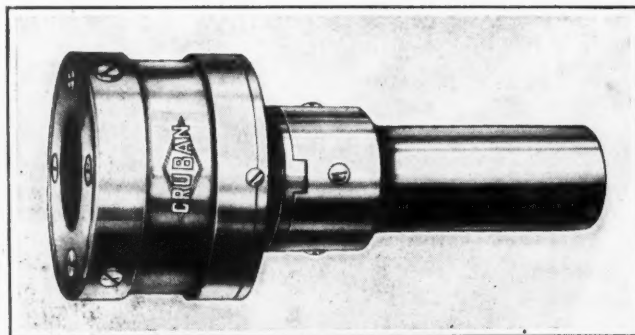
Releasing and Floating Tap- and Die-holder which is Self-aligning and has Hollow Shank
